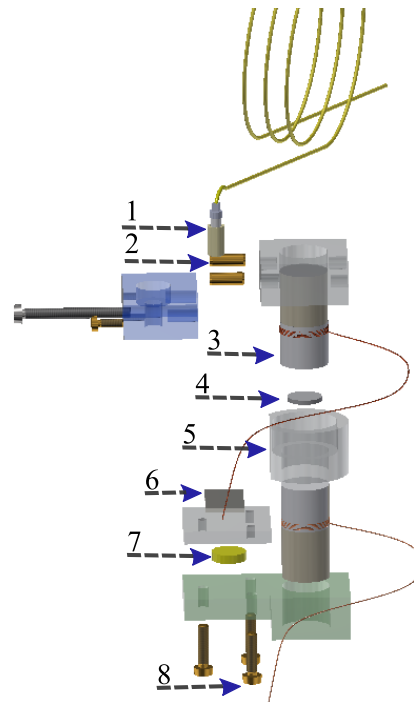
Detailed view of the construction of the sample space from Fig. 4.3b. It shows the lens holder with the piston upper part(1-3), and the integrated alignment insert, see Fig. 4.14 in the lower part(6-8). The measurement results obtained with this option are presented in Fig. 5.11
